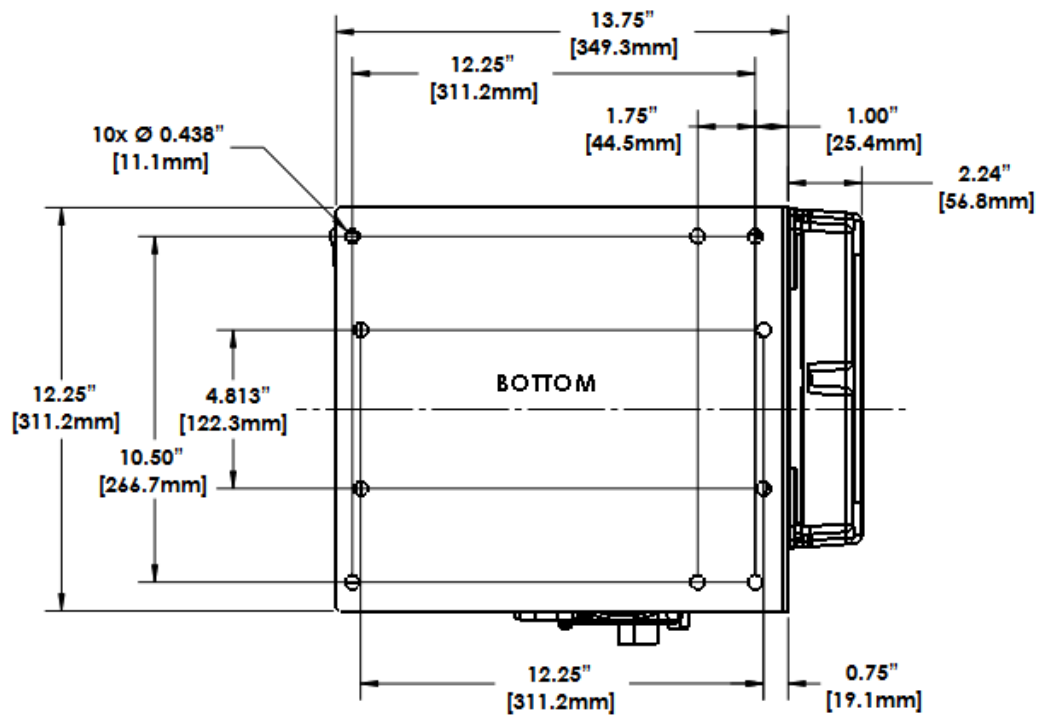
Base Plate Mounting Hole Locations – 1.7 and 2.1
